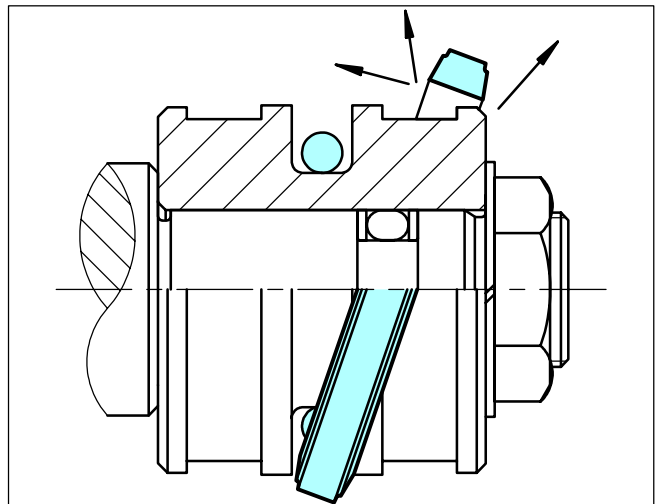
Fitting the seal ring onto the O-Ring in the groove
